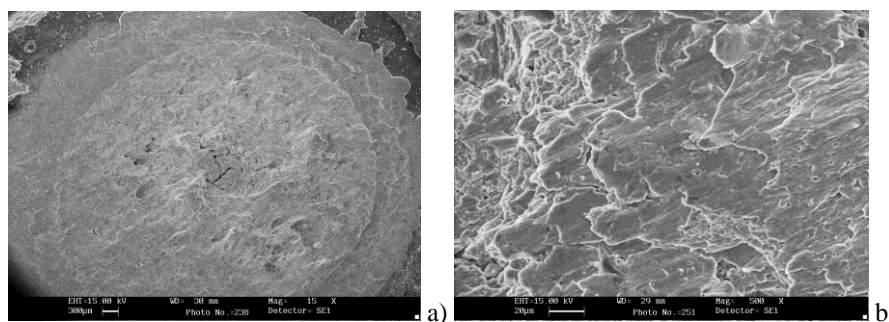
SEM Fractographs of weld bonded Al 5052 H32 under conditions of tensile shear load a) macrograph of entire fracture surface of weld bond and b) micrograph of fracture surface showing elongated dimples
